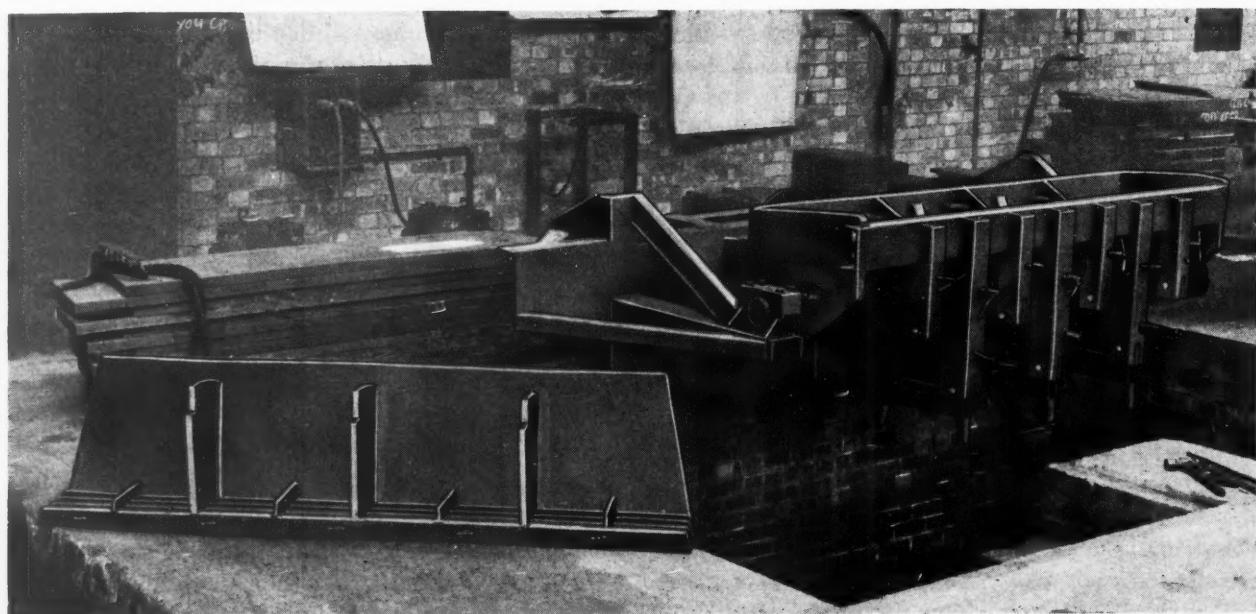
(Below) Welding manipulator for the radiator louver, which is mounted over a pit and has movement through 360 degrees about two axes at right angles
